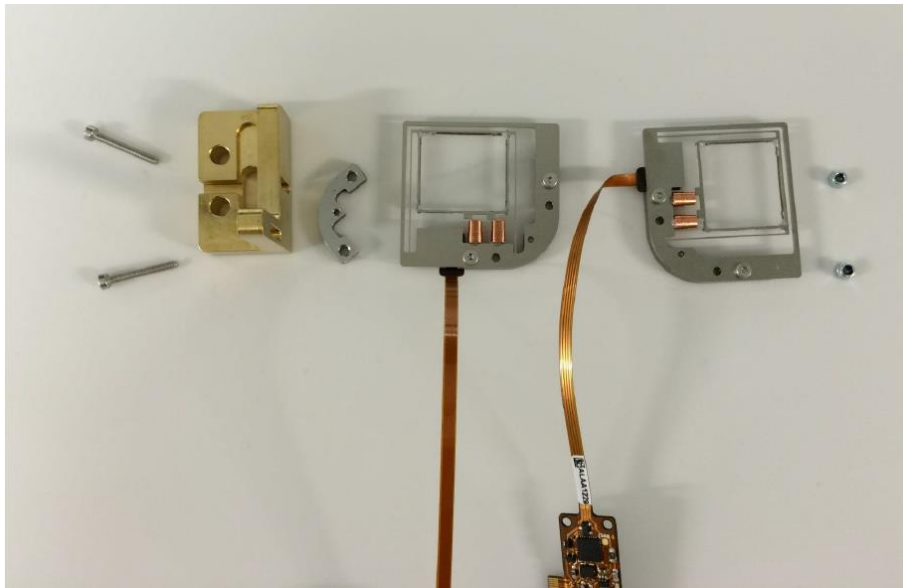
Parts delivered when purchasing the LSR-4C-LL together with the LSR-4C-LL mounting kit and LSR-4 Bracket kit.
